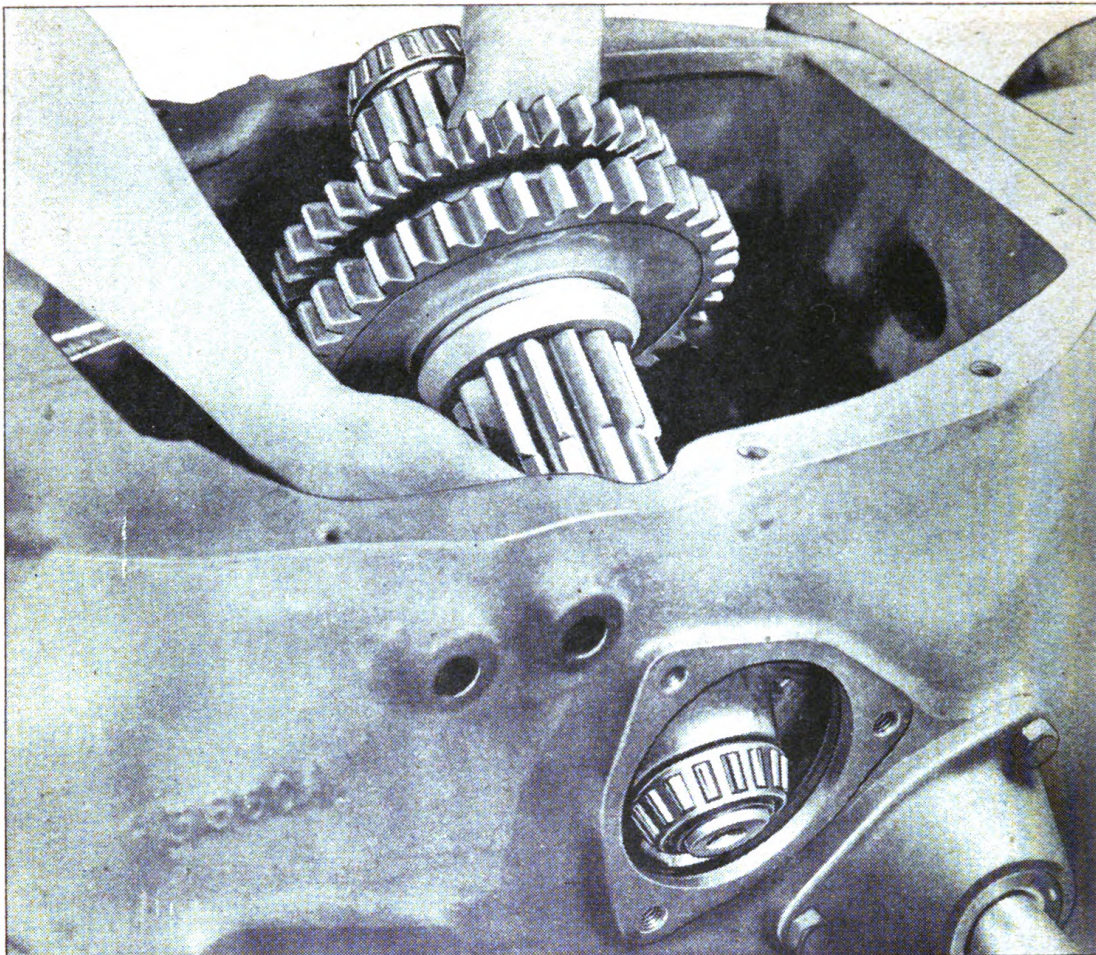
Removing Sliding Gear or Second Reduction Shaft
